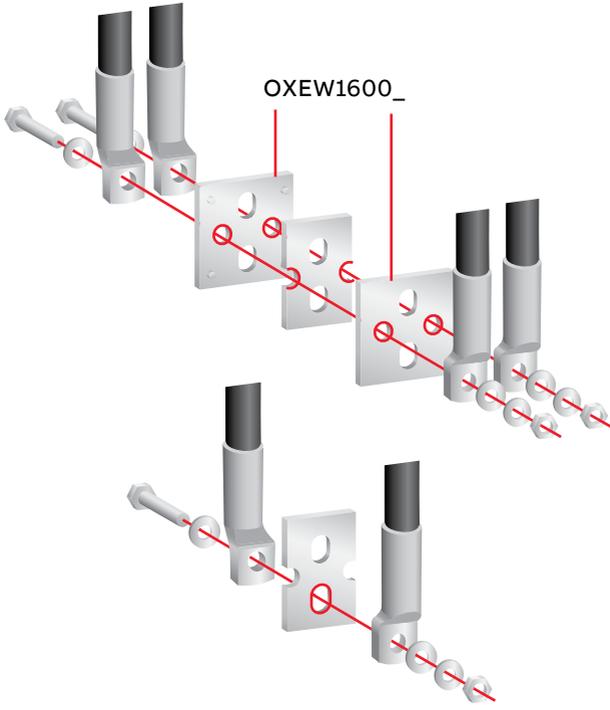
OX_800U...1600, wiring / cable lugs
